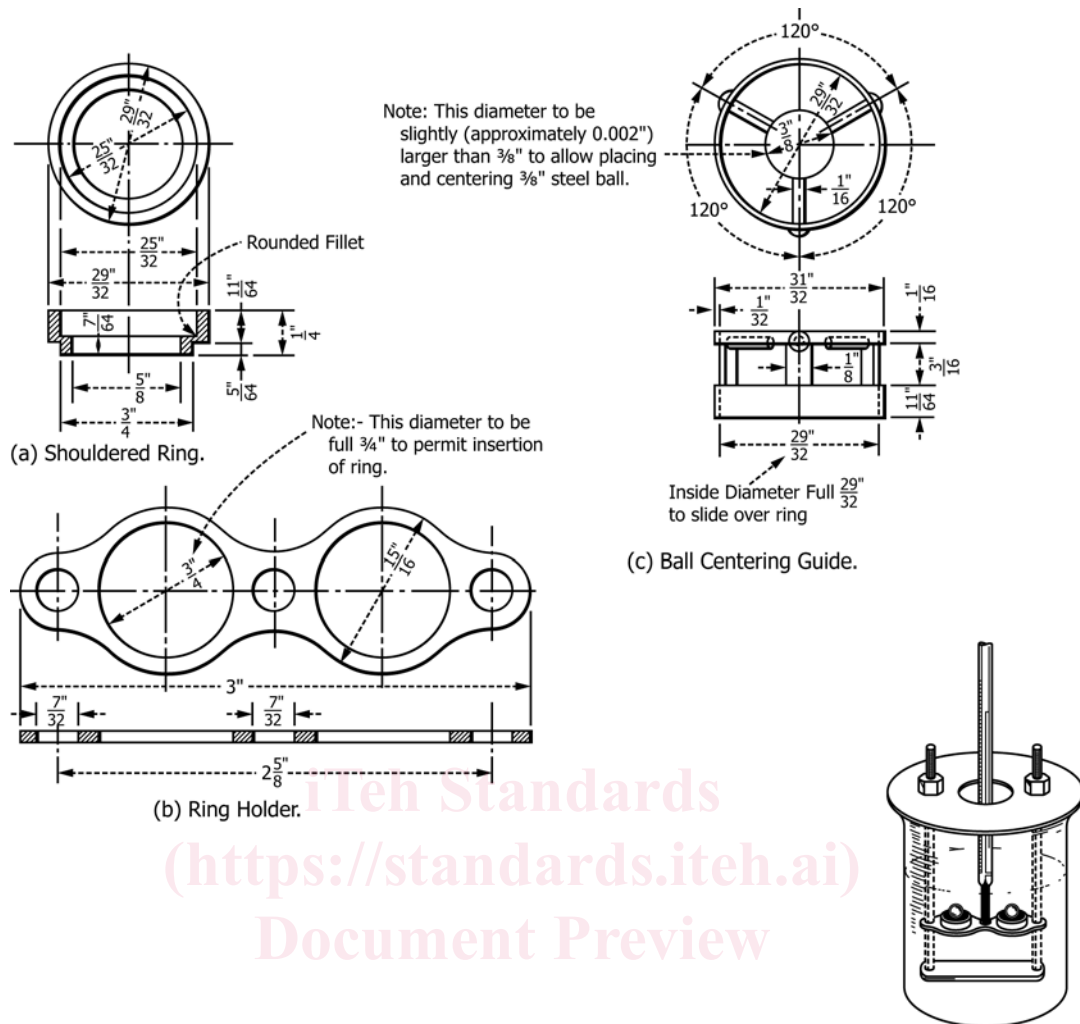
Shouldered Ring, Ring Holder, Ball-Centering Guide, and Assembly of Apparatus Showing Two Rings
